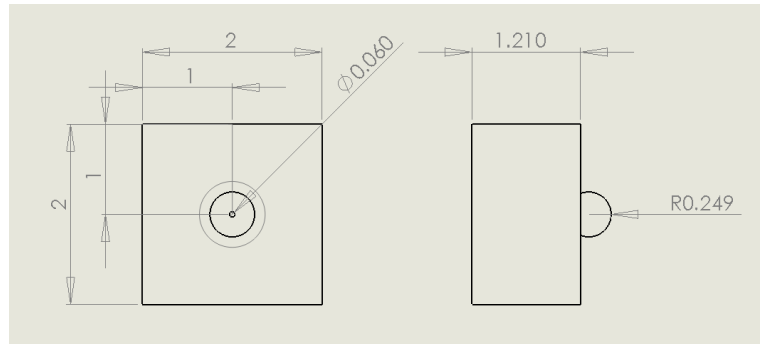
Bottom and side dimensions of single-lead BGA in mm.
